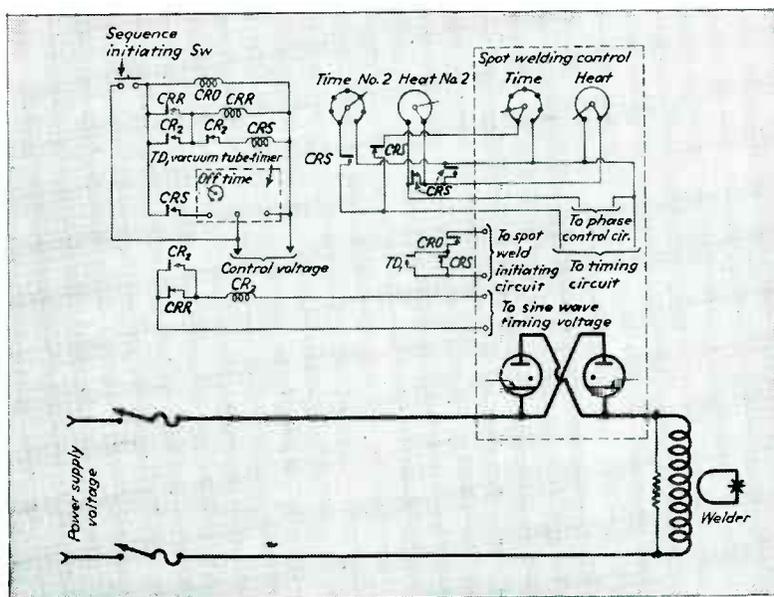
Auxiliary control circuits for re-initiating spot-welder control for post-heat treating
